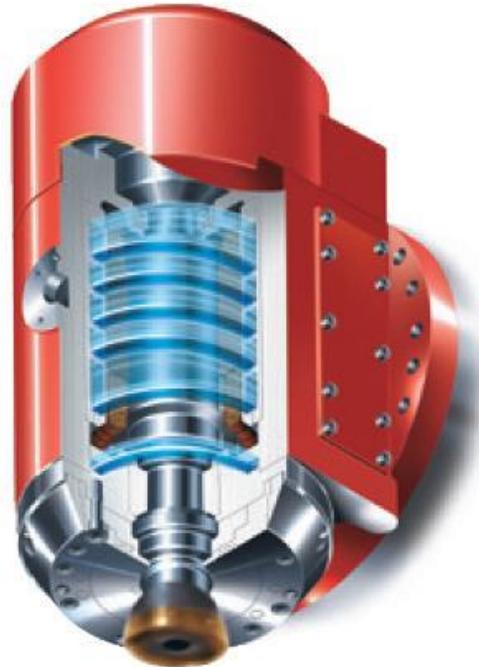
Tool spindle of NT 4250 DCG Turn & Mill CNC machine enabling use of rotational tools, cooling of the spindle in section view.
